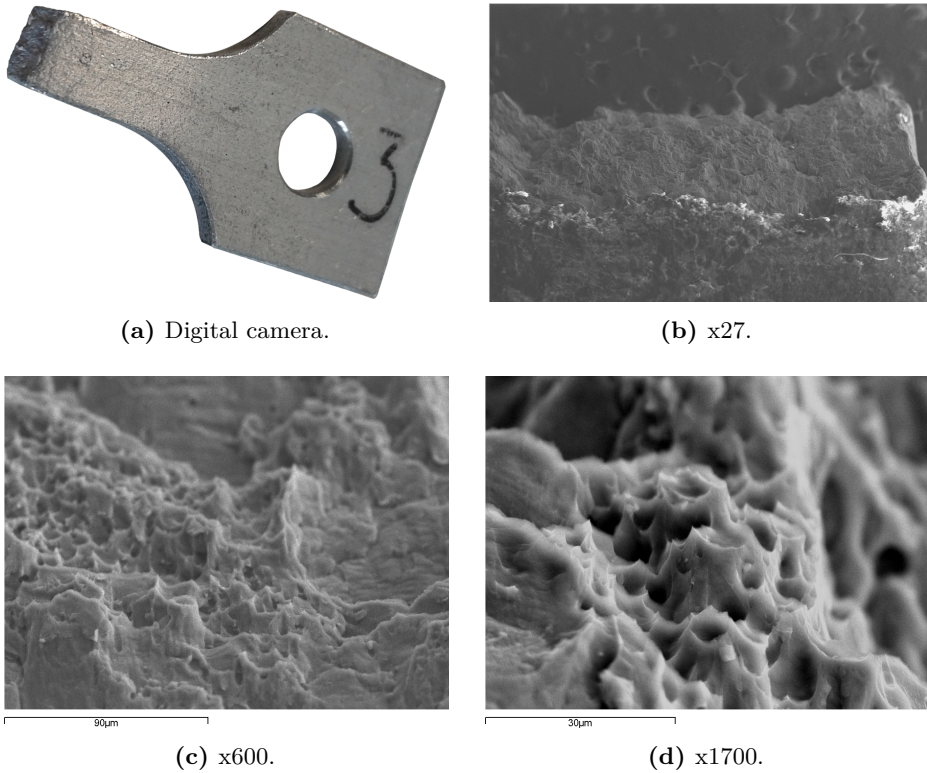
Digital camera and SEM images of the fracture surface of a AA6063-T5 extracted tensile specimen.
